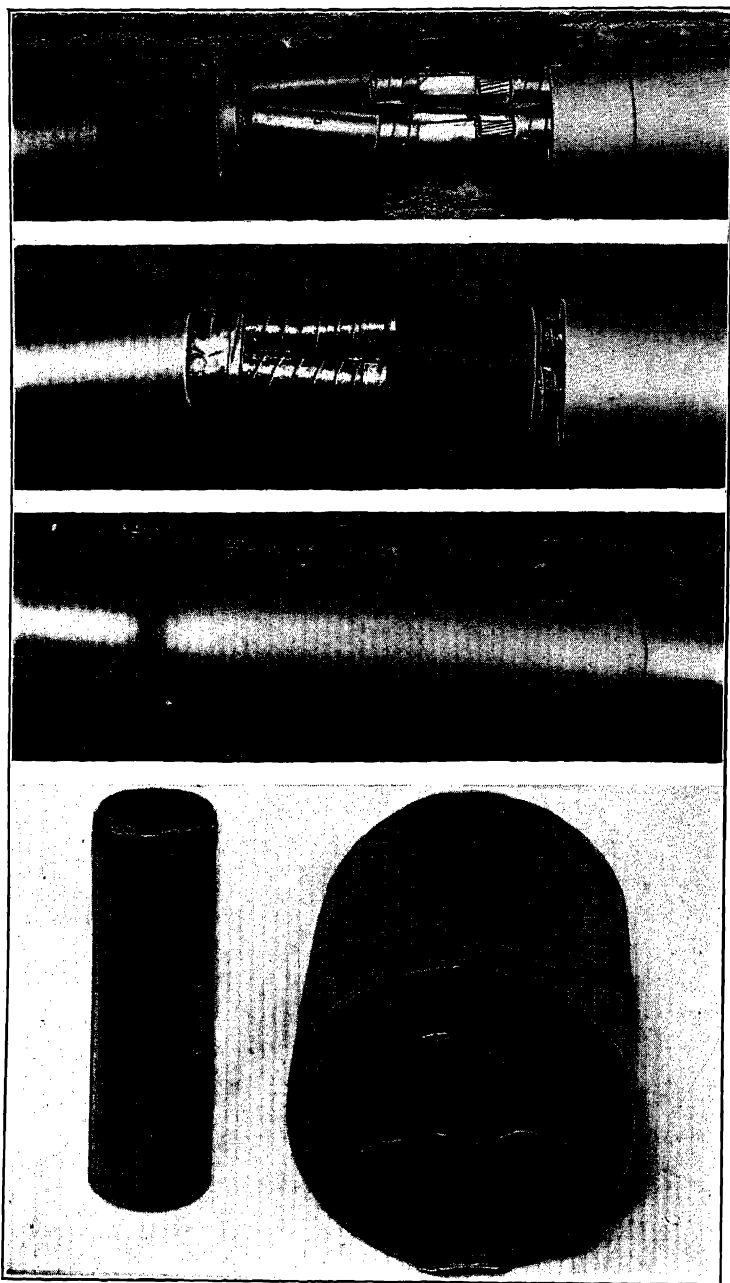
METHOD OF MAKING A JOINT ON A THREE-CONDUCTOR CABLE FOR HIGH-VOLTAGE WORK.
